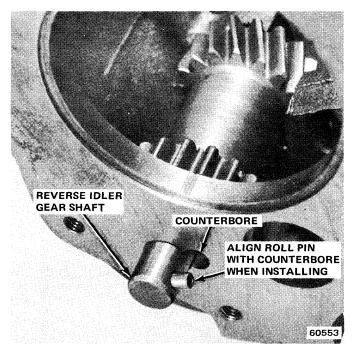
Removing-Installing Reverse Idler Gear Shaft
